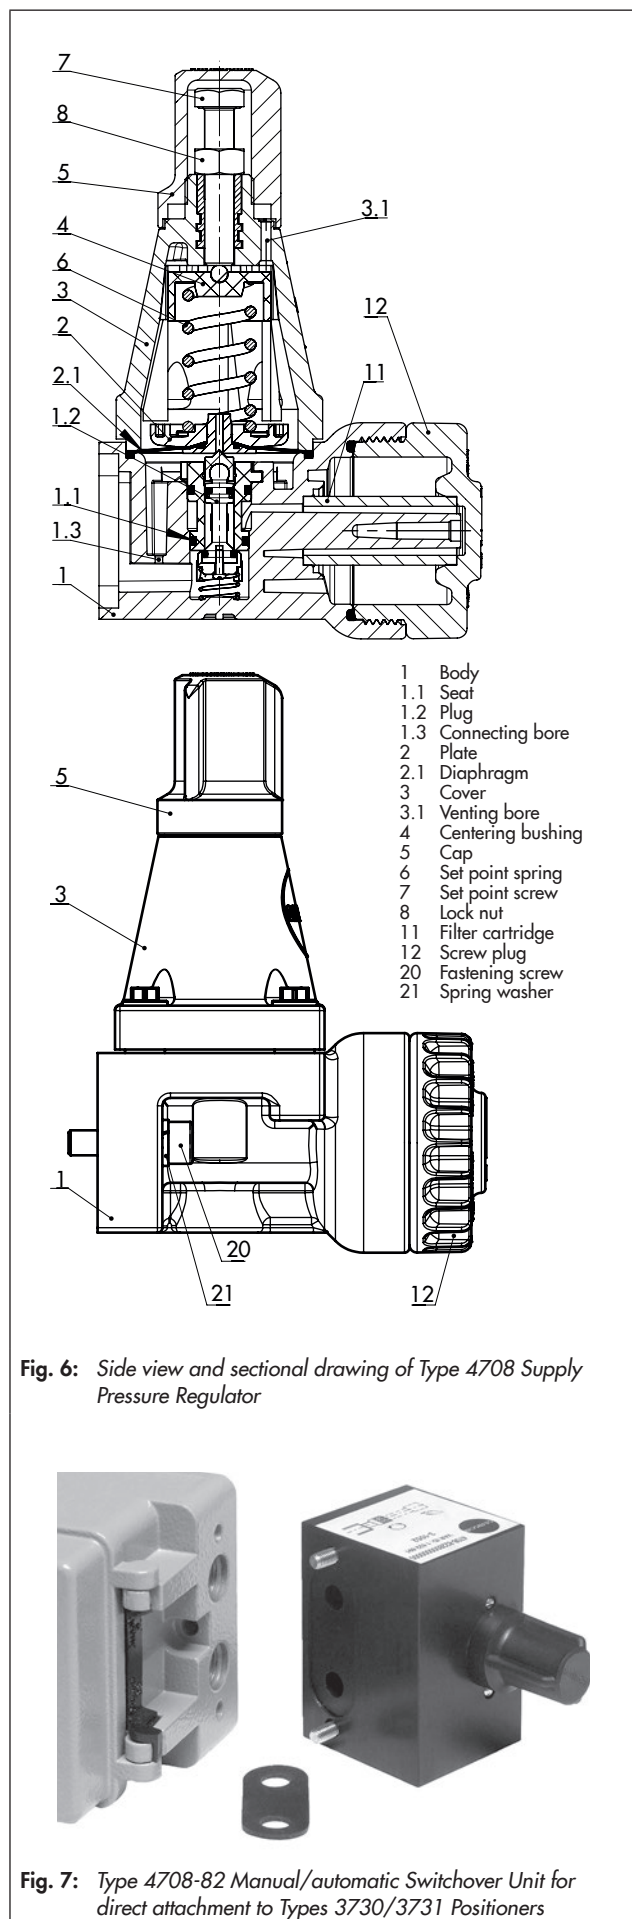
Side view and sectional drawing of Type 4708 Supply Pressure Regulator
